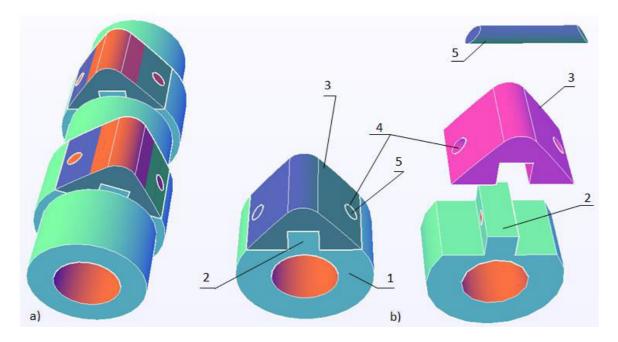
a shows a schematic view of part of the camshaft. b shows the construction of camshaft 1 cam heel and its elements. Here, 1- cam heel, 2-shaped surface of shaft key, 3-cam, 4-hole opened in the direction perpendicular to the shape of the cam, 5-axis connecting cam with cam heel are extra
